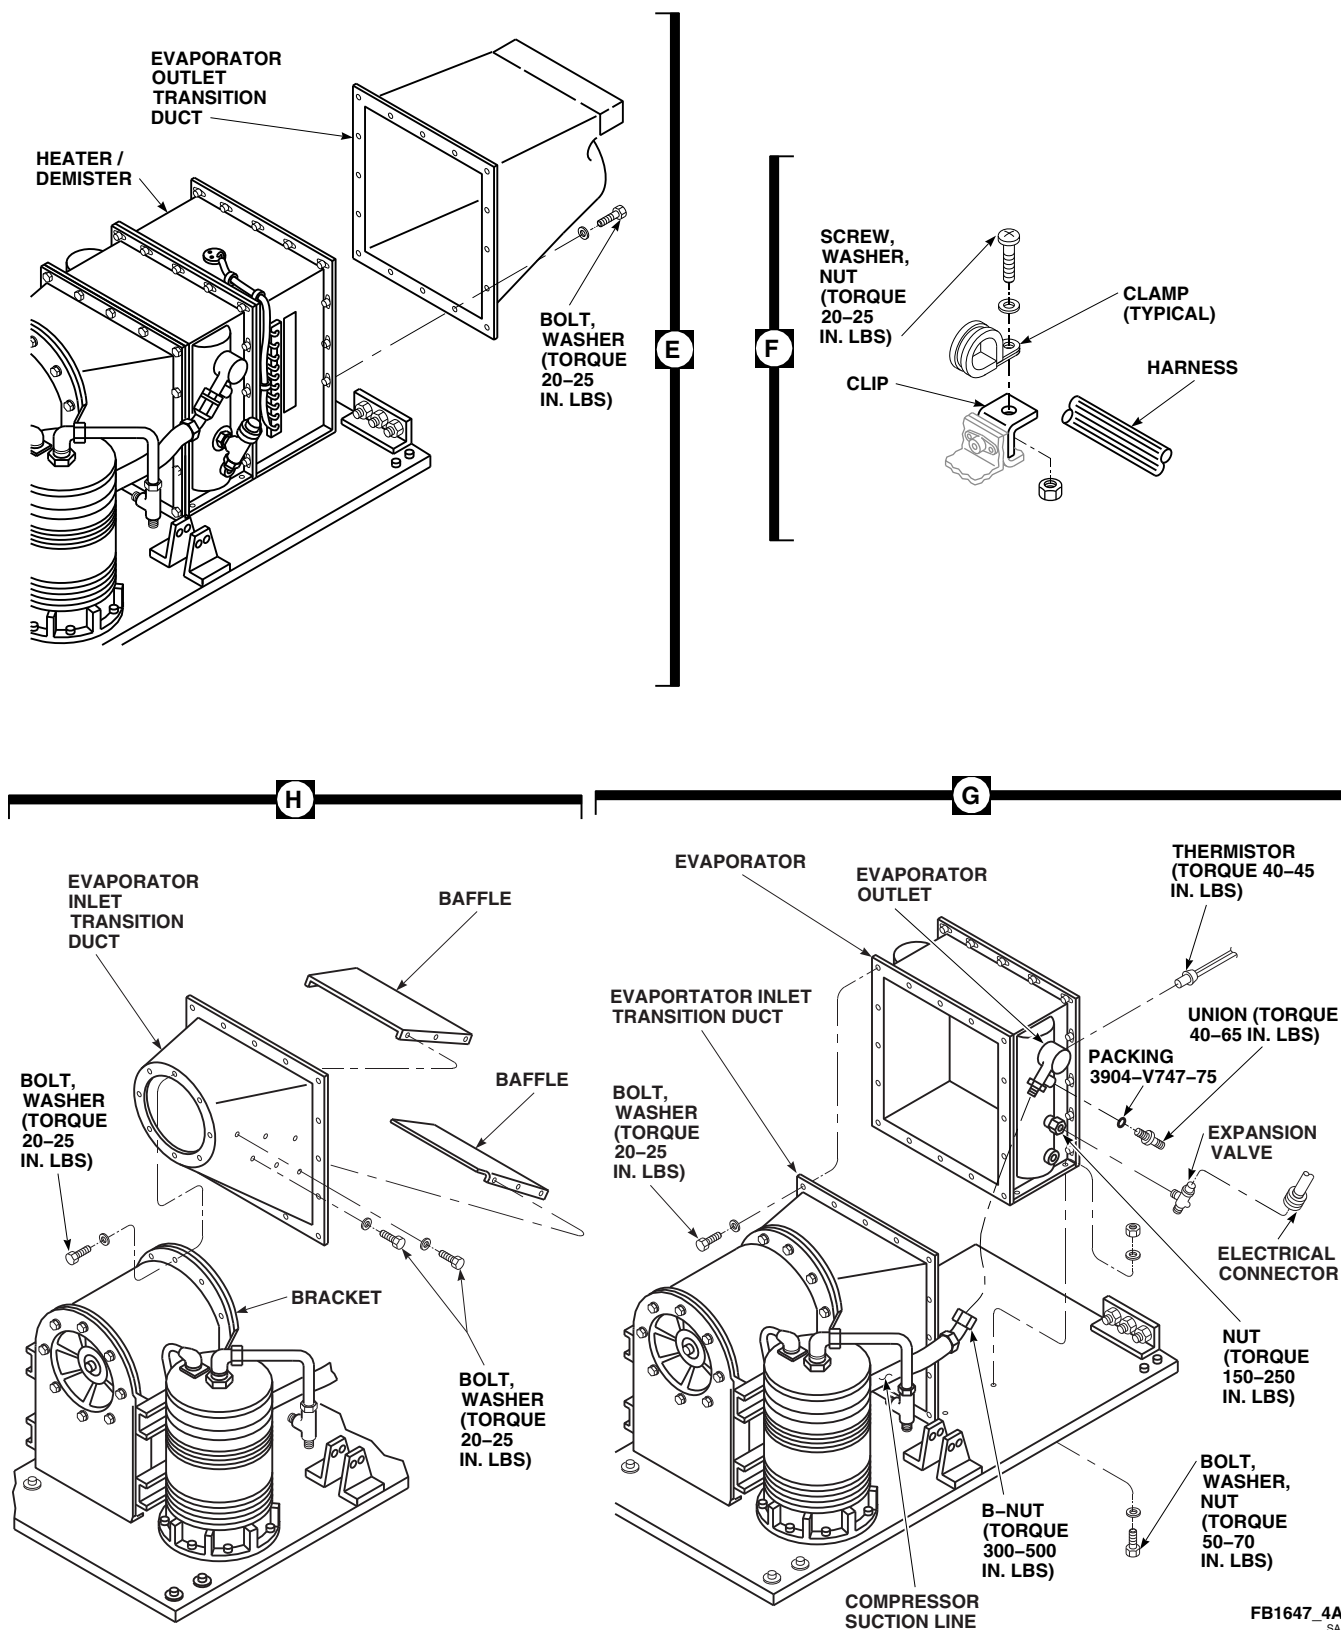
REPLACE ENVIRONMENTAL CONTROL SYSTEM DUCTS, EVAPORATOR, AND HEATER/DEMISTER (BENCH) (SHEET 4 OF 4)
